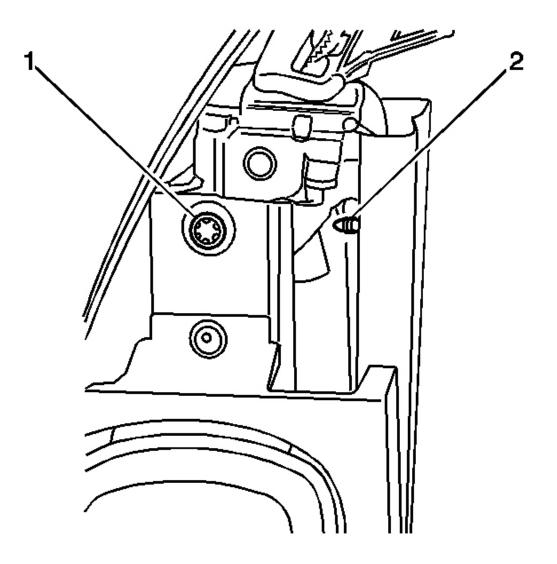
Locating Seat Belt Retractor Bracket Bolt & Push Pin Courtesy of GENERAL MOTORS CORP.
